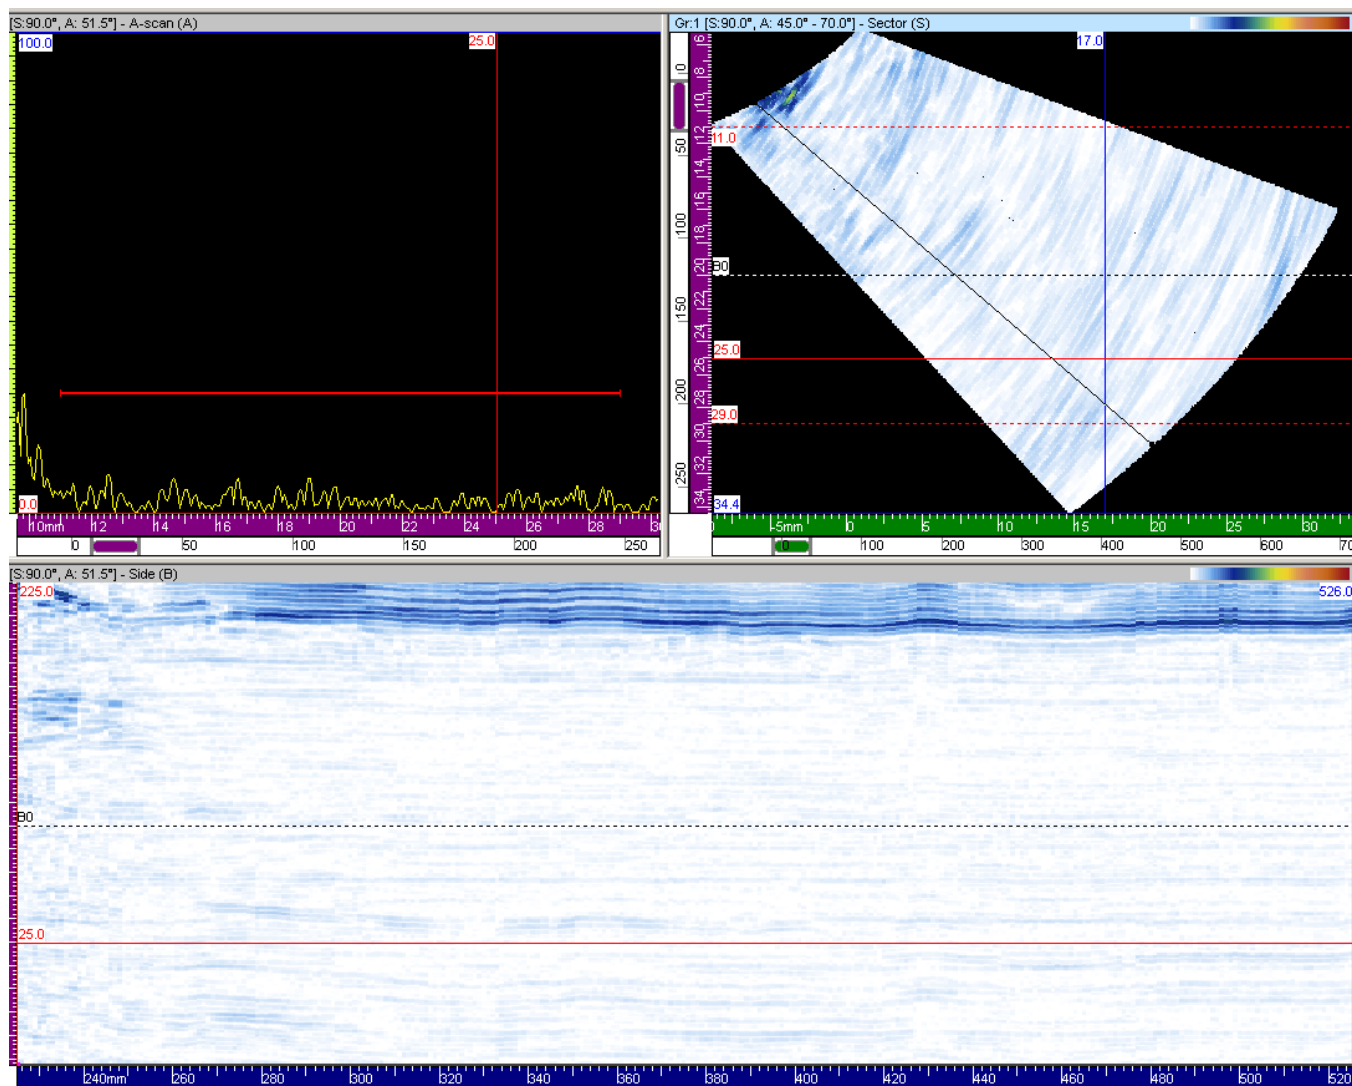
Example scan of base weld of tank WL23 showing no defect indications.
